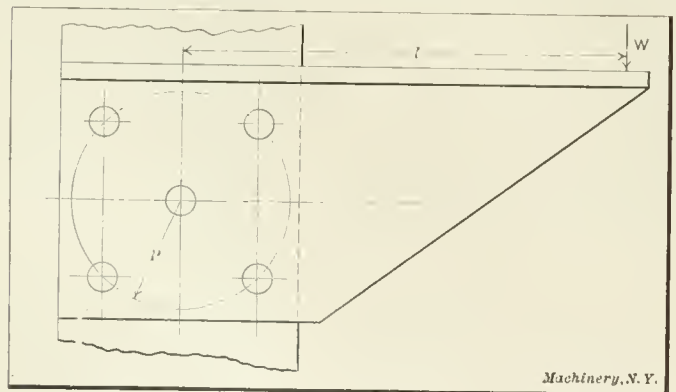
Eccentrically Loaded Rivet Group—Rivets all at Same Radius
